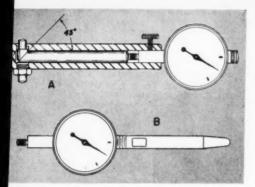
Gage shown at (A) is designed for gaging bore diameters and for internal measurements between shoulders. Gage (B) is another design for internal measurements and bores, particularly of large diameter.
